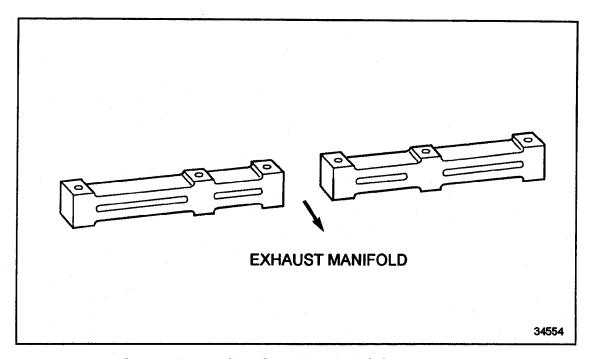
Spacer Bars with "Out" Marks Adjoined
